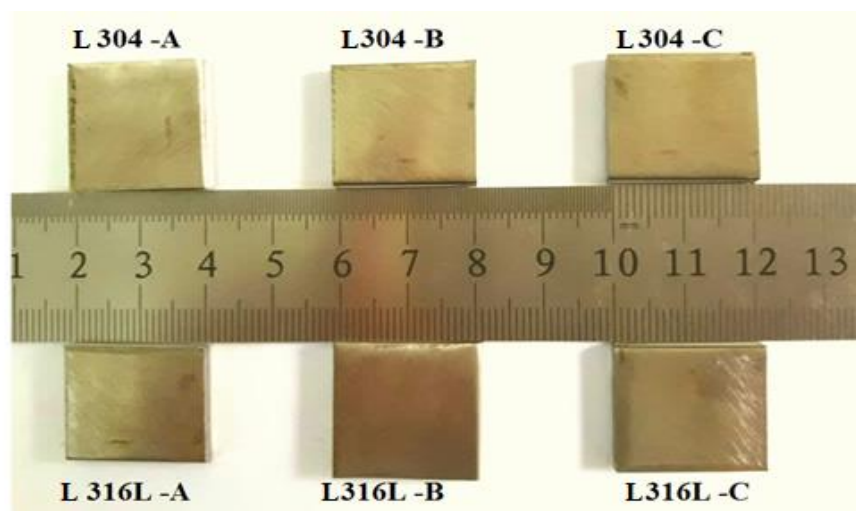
Non-welded specimens of AISI 304 and AISI 316L austenitic stainless steels. sample coding reflects the specimen's number, A, B and C
